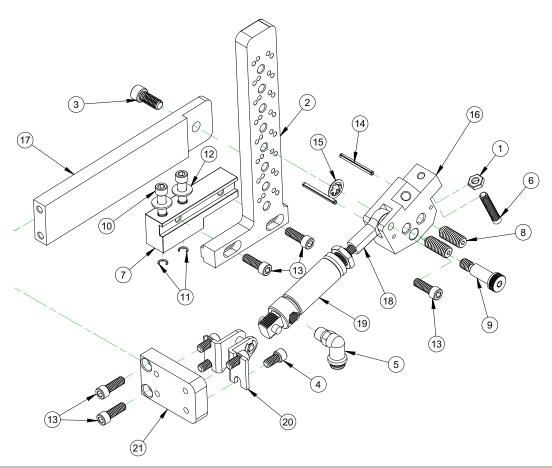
PCU MANUFACTURER PARTS (P/N 96917)
